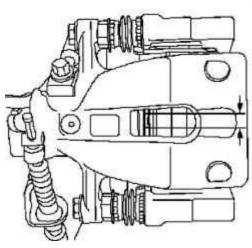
Vvorachivanie brake piston: 1, 2 - special tools
